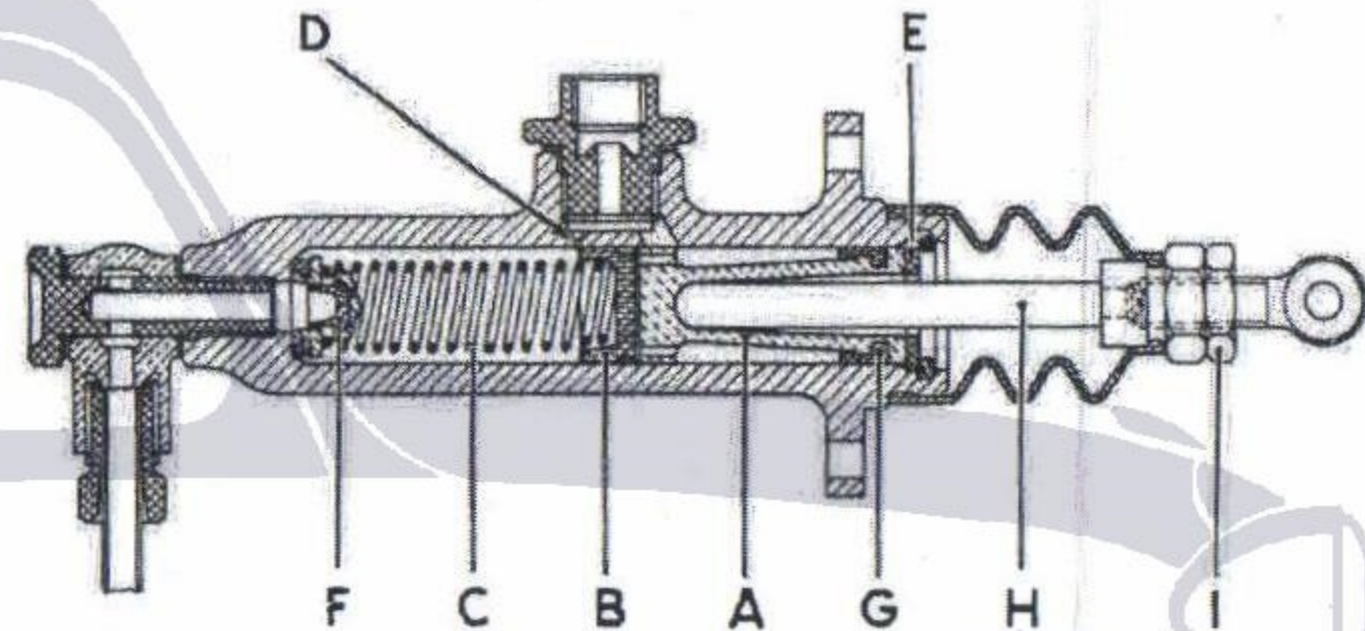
Section of the hydraulic brakes control pump; Lockheed type.
